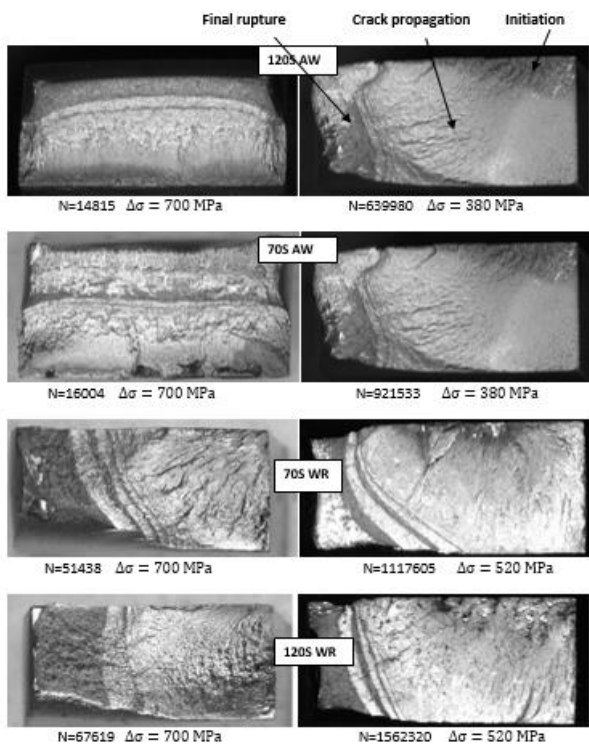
Fracture surfaces of the specimens with the lowest and the highest number of cycles within each welding condition
